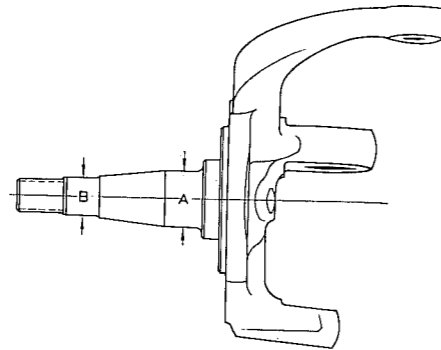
Wheel bearing seat dimensions on the steering knuckle.
